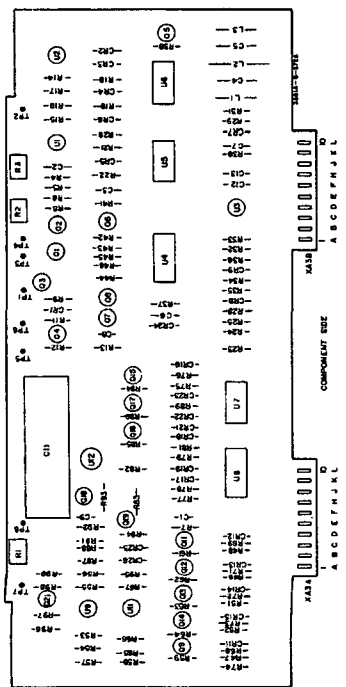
Detector Assembly (A4) Schematic and Component Location Diagram. Rev. B 7-177-18
